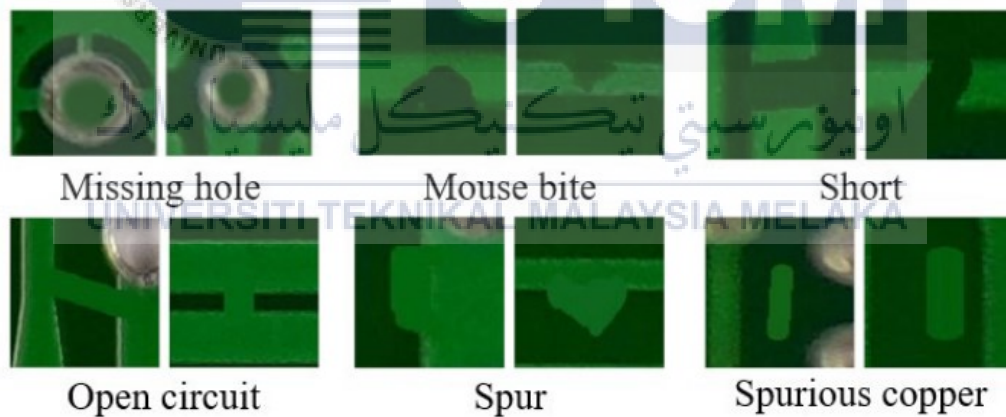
Types of defects present on PCB (Zhang & Liu, 2021)
